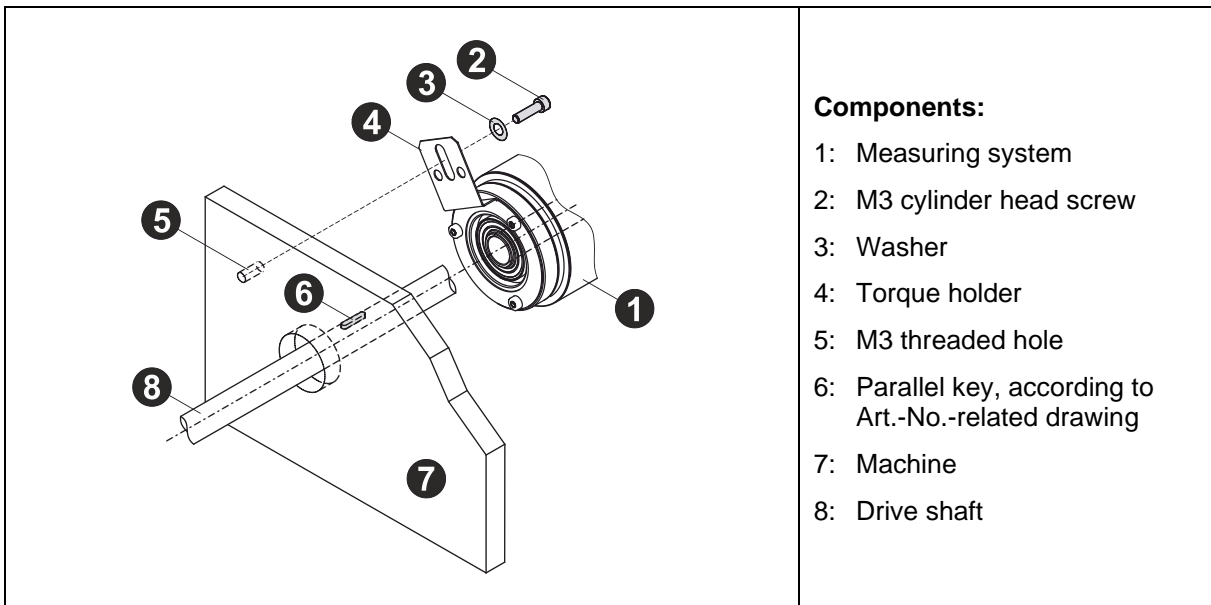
Mounting with torque holder (Spring metal sheet with one wing), principle illustration
